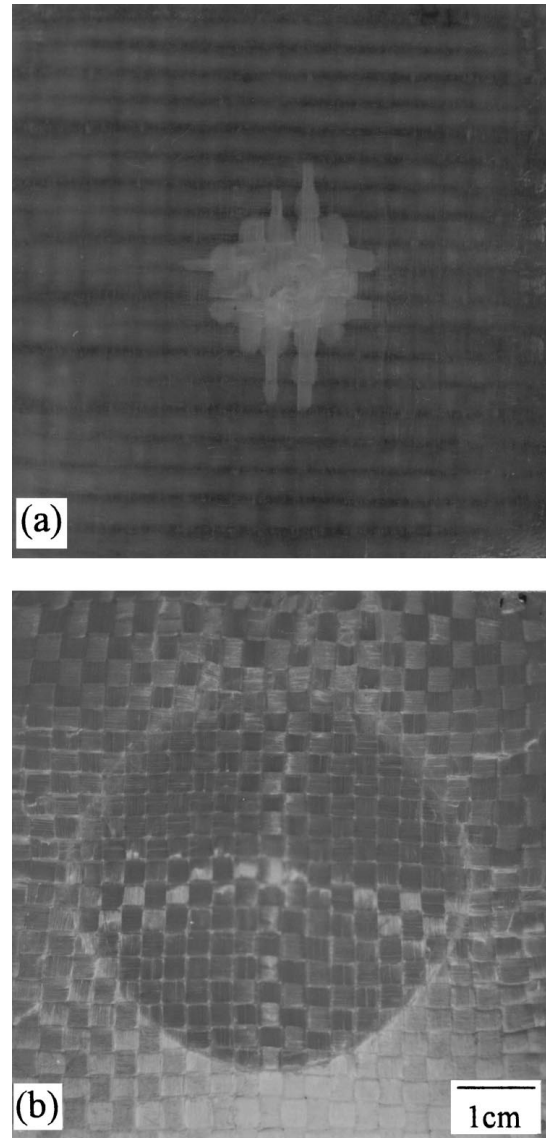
The fracture surfaces of composite G4 and A4 after impact: (a) back surface of composite G4, (b) back surface of composite A4.
